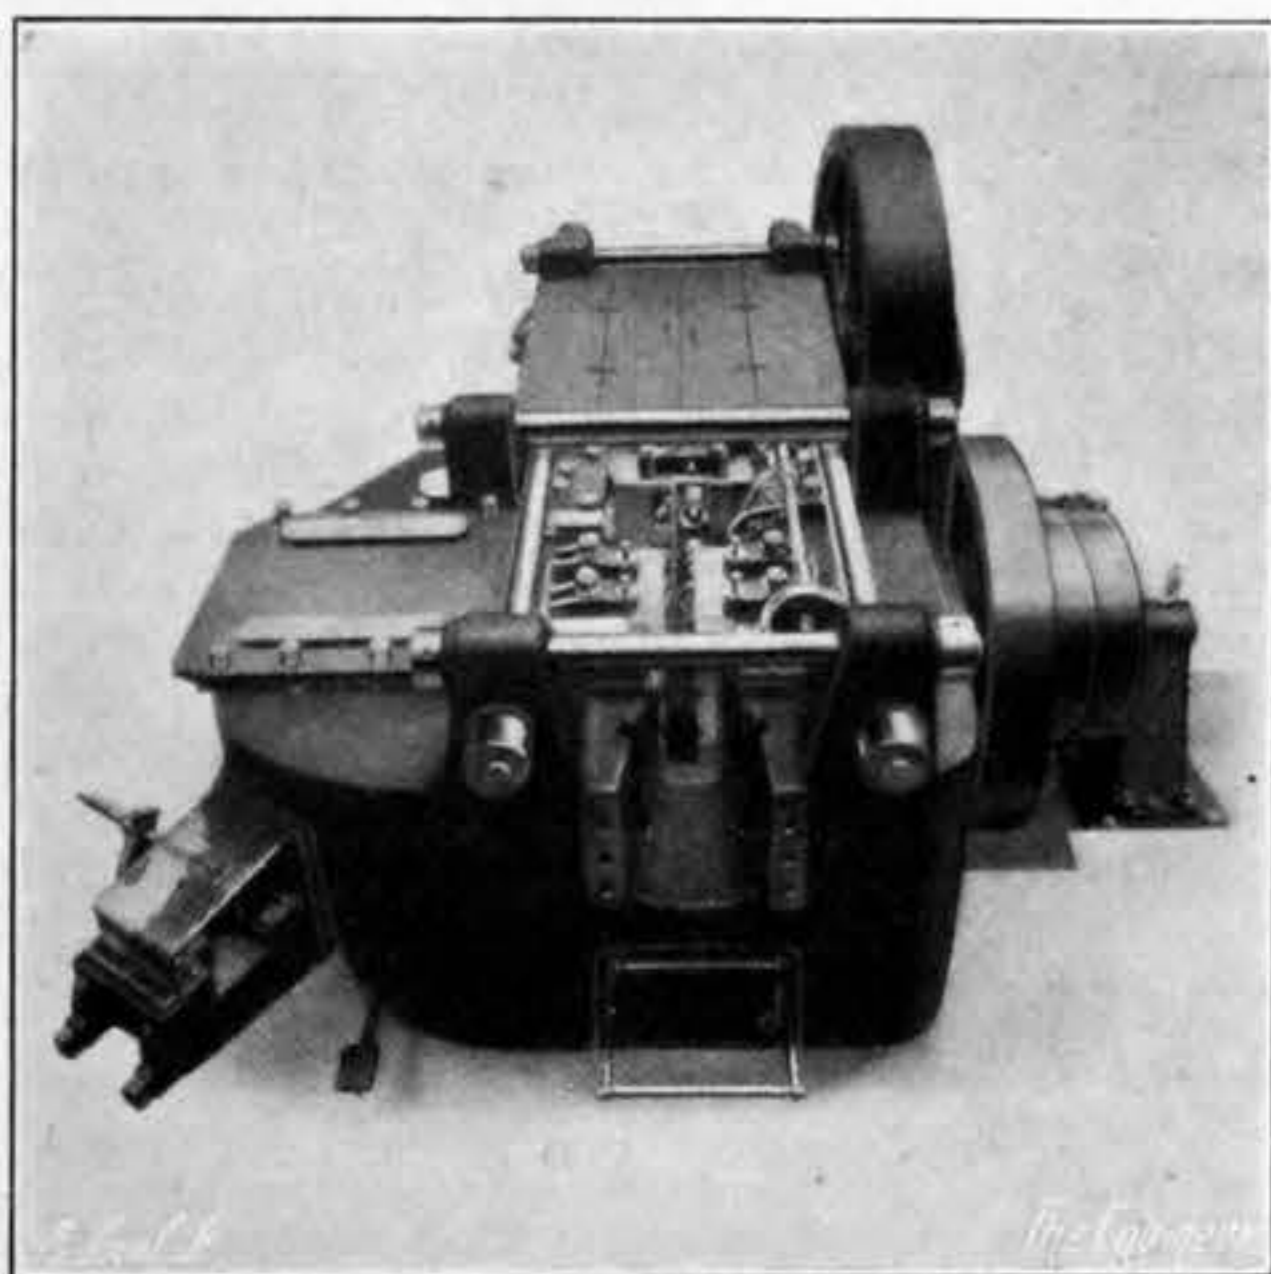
FORGING MACHINE—COVENTRY M.T. WORKS
